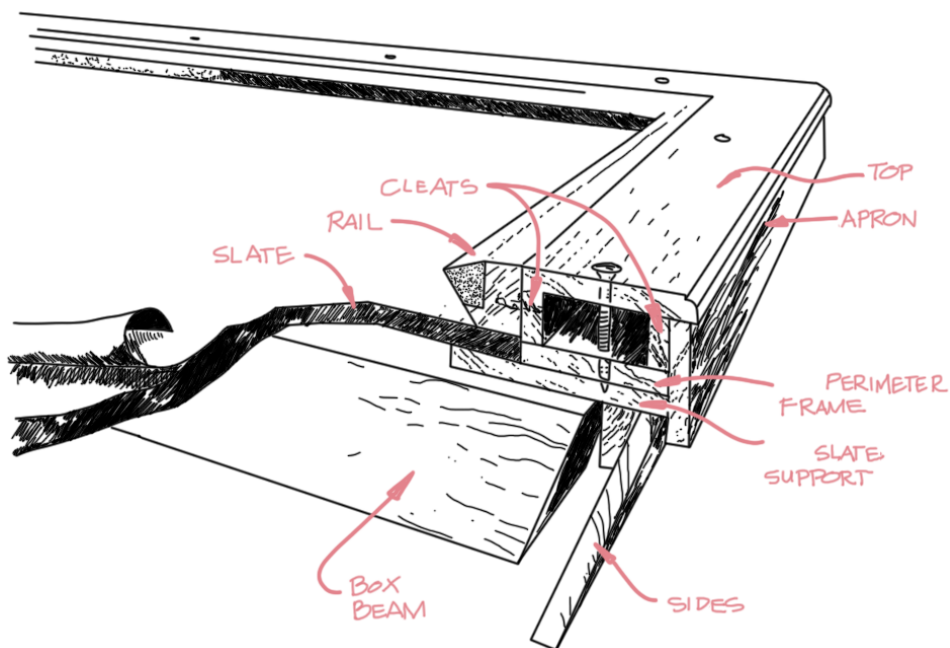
Section of a Billiard Table shown as a Composite Fuel Package
